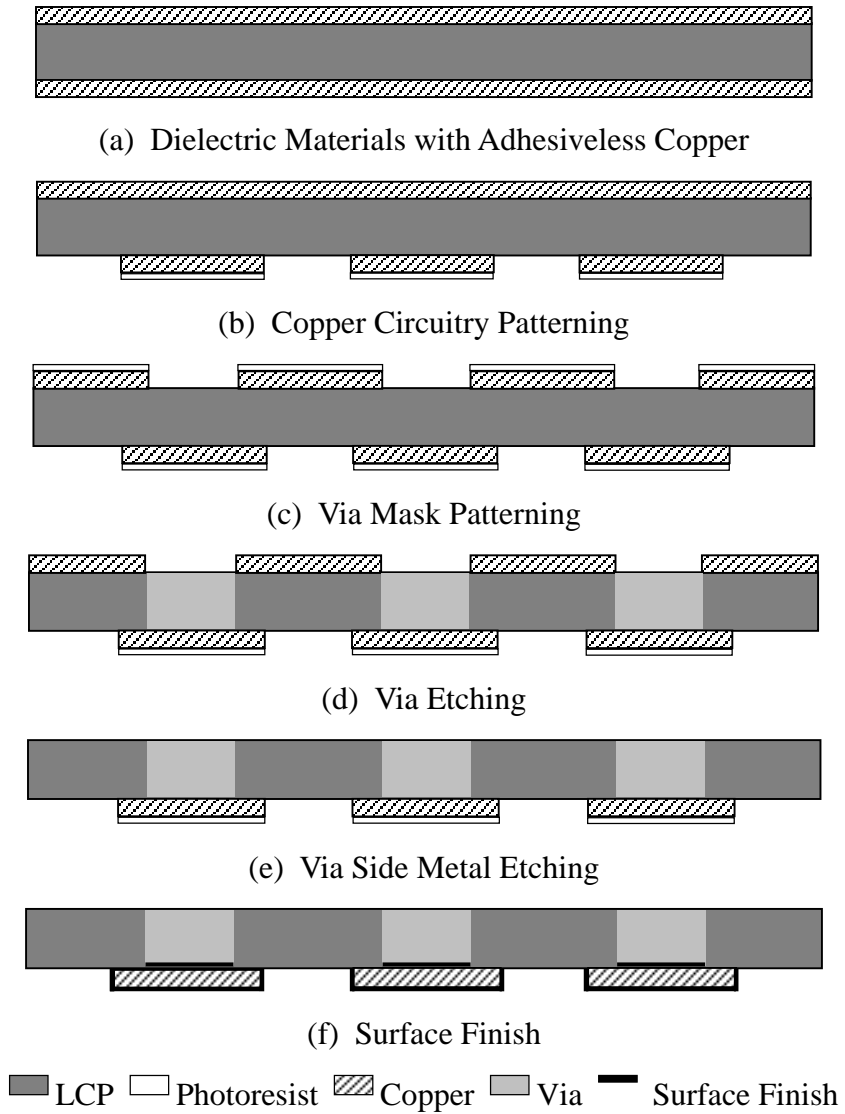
Scheme of Backside Assembly Design Substrate Fabrication
